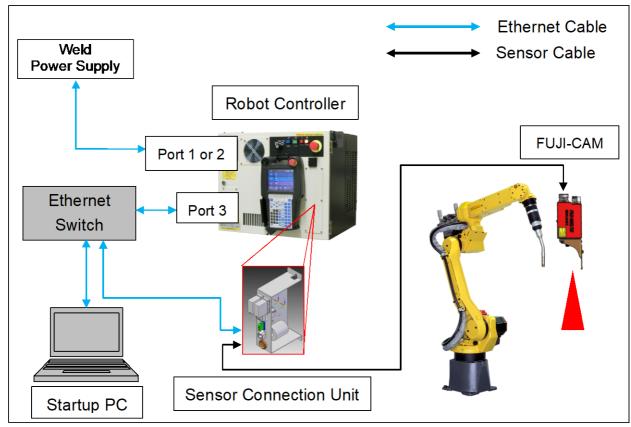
(a) Outline of the welding line detection system
